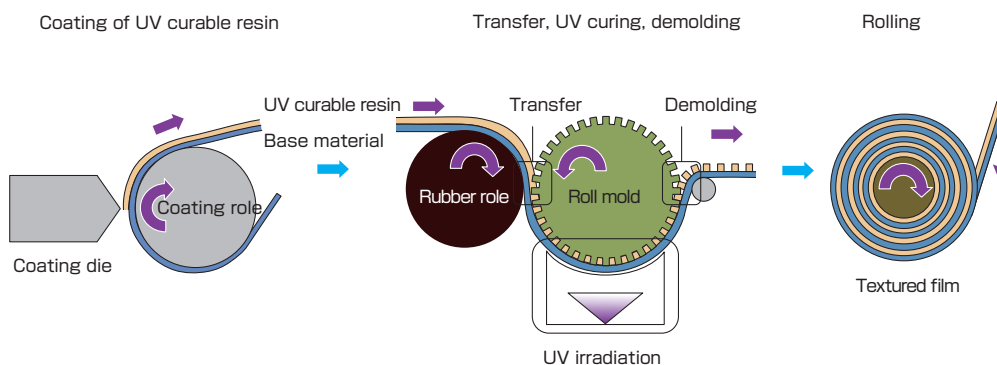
Outline of base material fabrication method by roll-to-roll method
